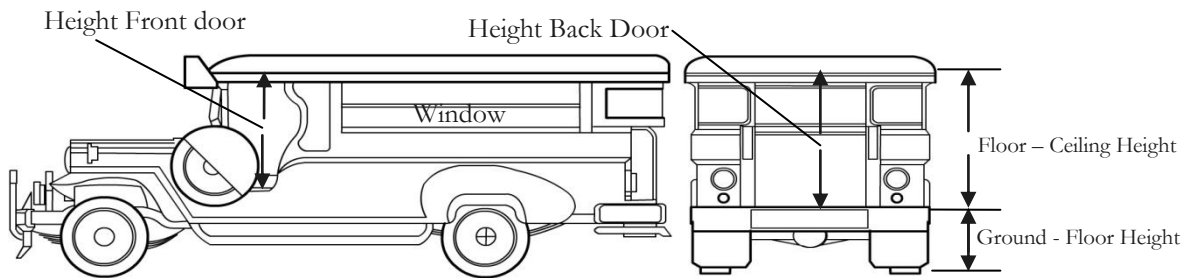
Jeepney's Floor - Ceiling Height, Ground – Floor Height, Service Door and Window
